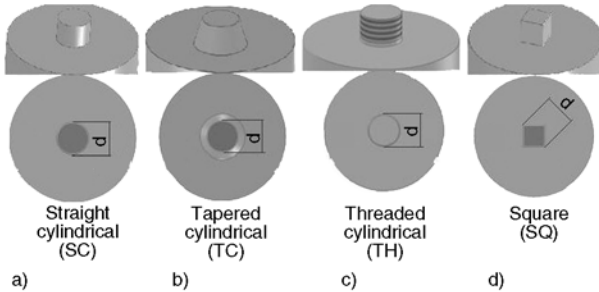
FSSW tool profile and pin size (d): a) straight cylindrical, b) tapered cylindrical, c) threaded cylindrical, d) square
